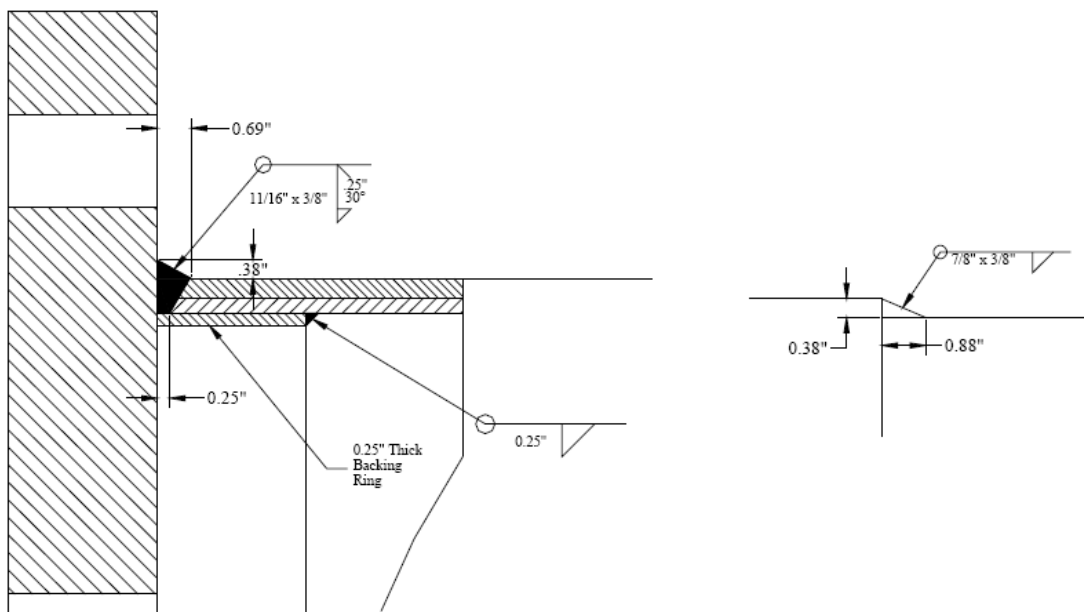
Wyoming detail with External Collar (Stam, 2009)
